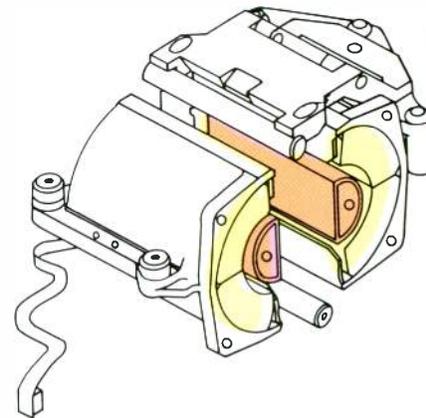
Voice-coil drive. Shaded areas represent the inner and outer magnetic assembly.
